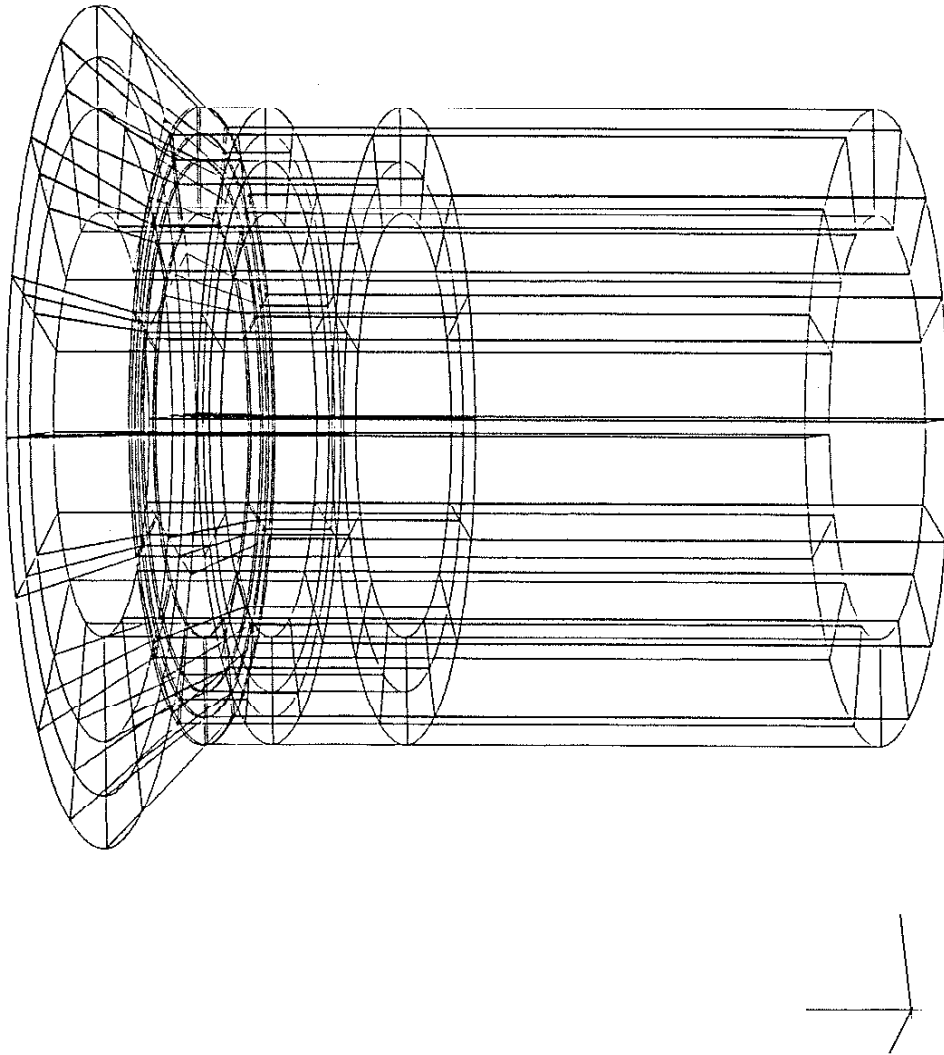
Finite element mesh of tube-to-plate welds (ratio of notch-root element size to notch radius = 1:4).
